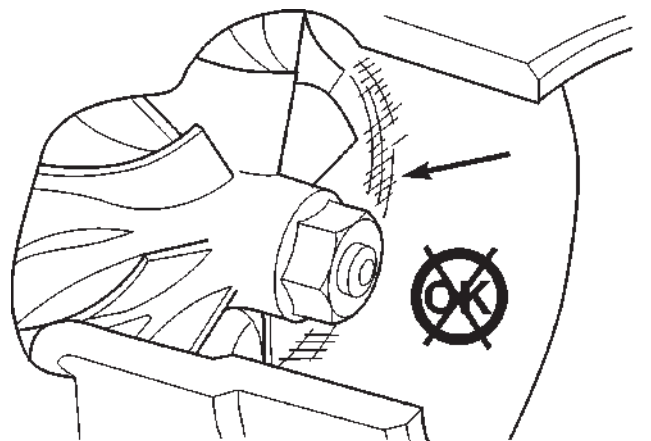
Inspect Compressor Housing for Impeller Rubbing Condition
